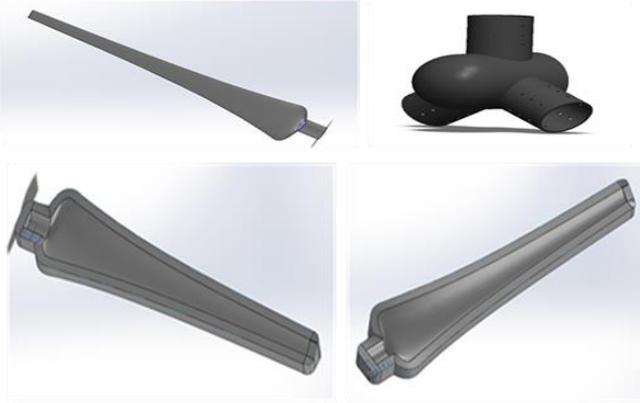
The mold, blades, and Hub in SOLIDWORKS.
